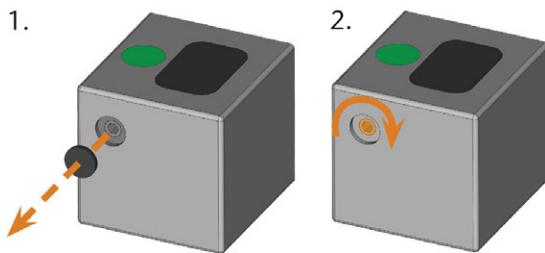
REMOVING THE PROTECTIVE CAP (LEFT) AND USING THE SCREW
